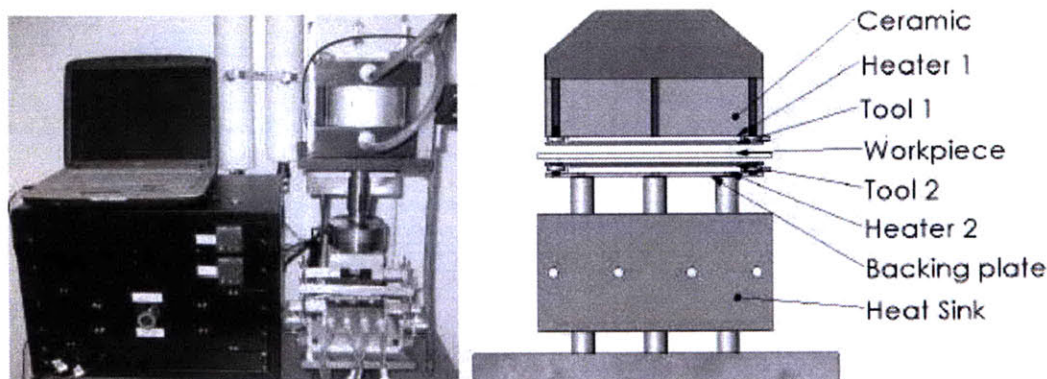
Rapid-cycle HME machine and the heater and forming stack.
